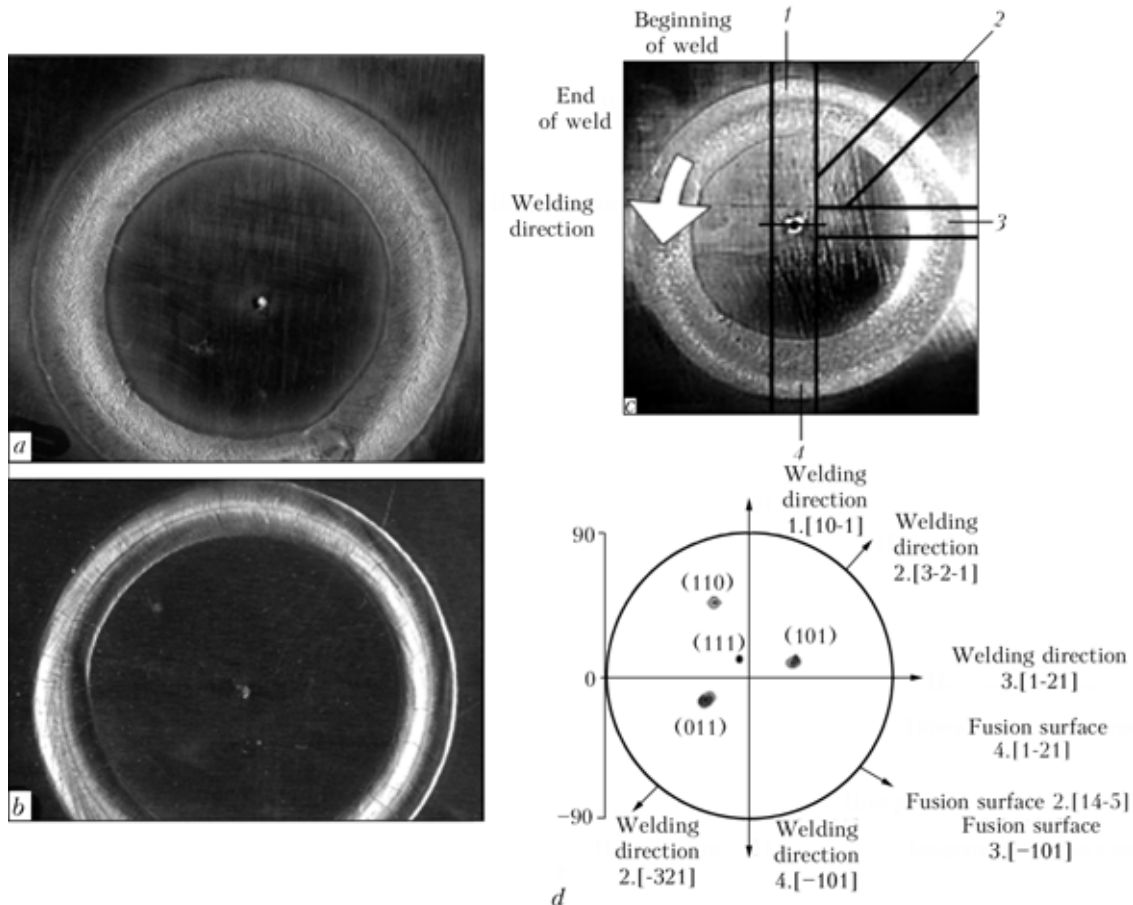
Appearance of circumferential welds at welding speed of 10 (a) and 60 (b) m/h, schematic of cutting of samples for experiments (c), and stereographic orientation of circular patch tests (d): 1-4 — sample numbers
